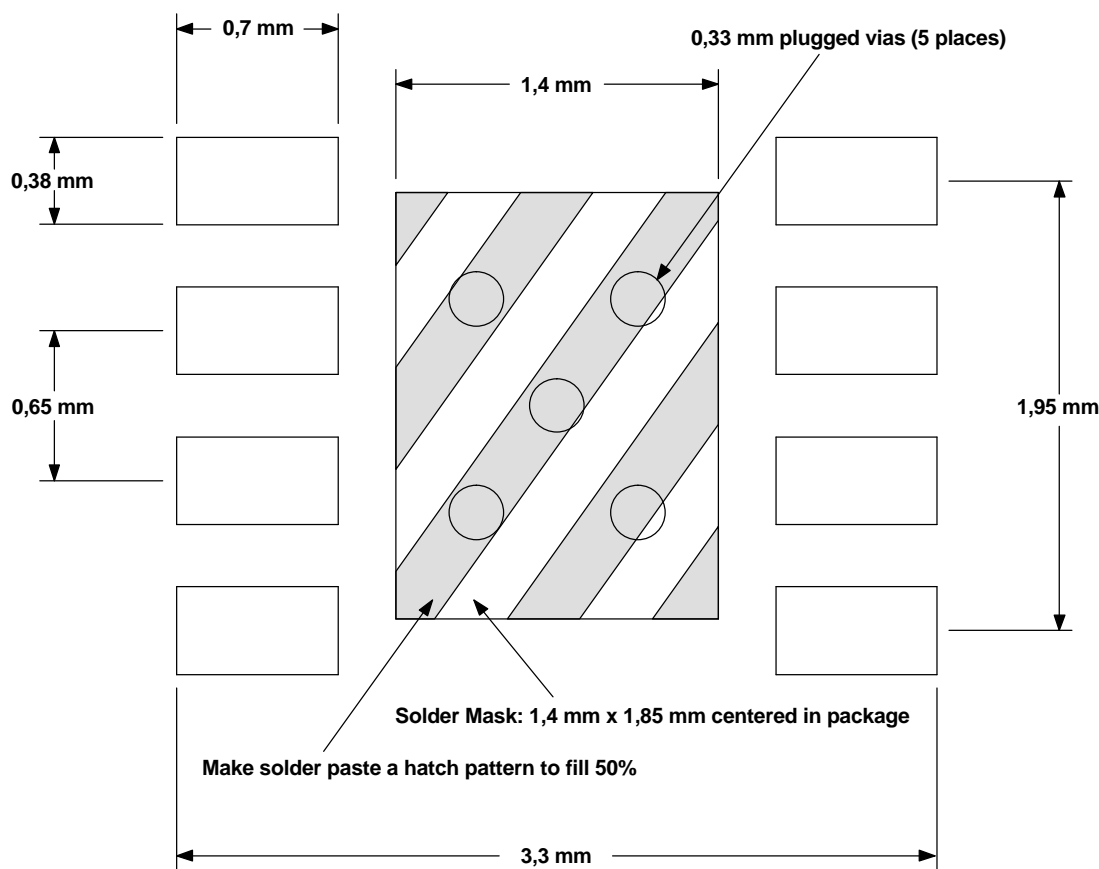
TPA2005D1 8-Pin QFN (DRB) Board Layout (Top View)
